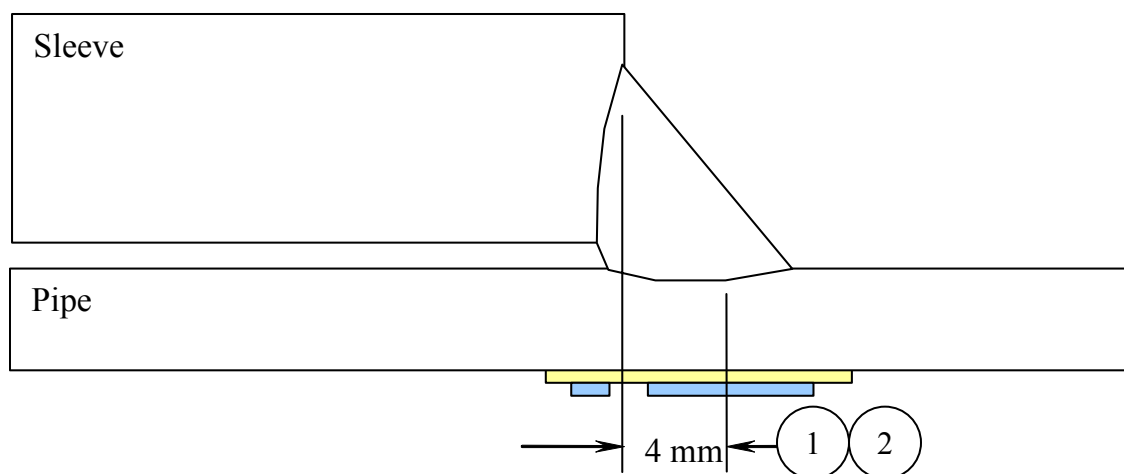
Location of Gauges 1 and 2 on Pipe ID Opposite Fillet Welds
